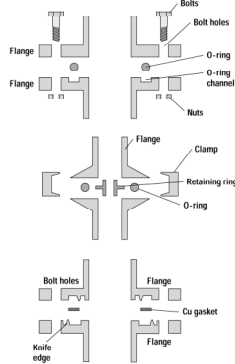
Two types of O-ring seals for medium vacuums and the Conflat® flange used for sealing high-vacuum systems.
